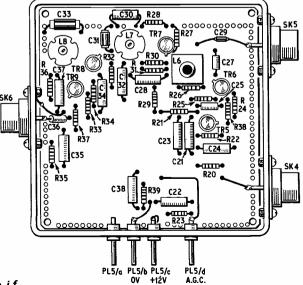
Veroboard layout and wiring details of the i.f. module
